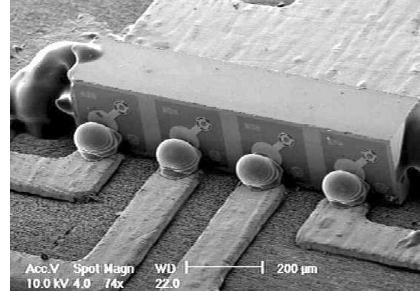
Array of four VCSEL lasers with 80  $\mu\text{m}$  solder ball for electrical interconnect printed into inside corner using solder jet technology.
